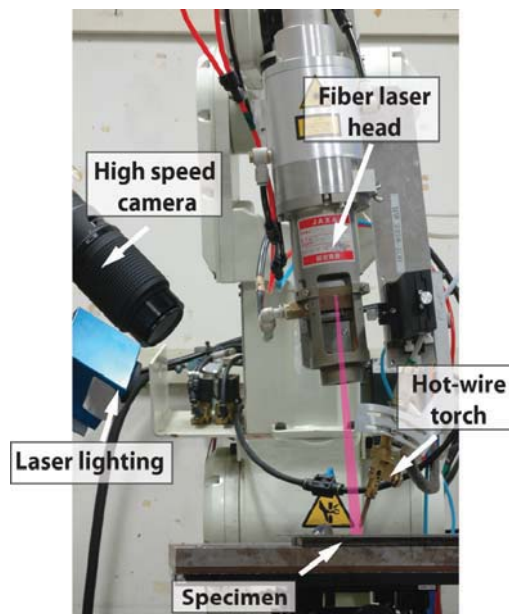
Experimental setup of hot wire laser welding.
